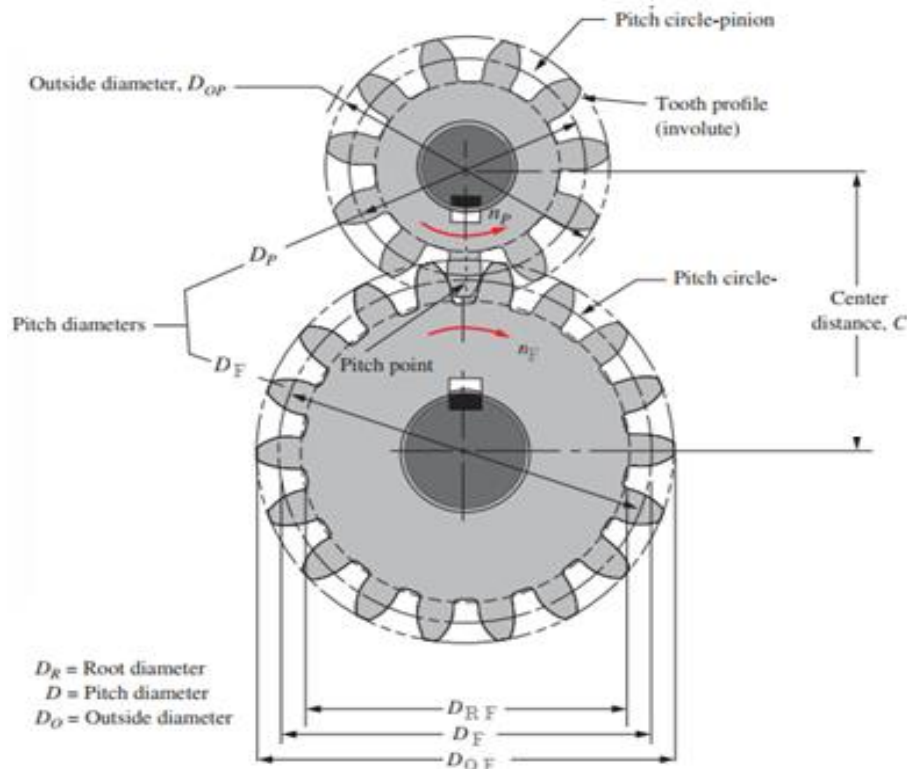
Pair of spur gears with pinion gear drives (Robert L. mott, 2016)
